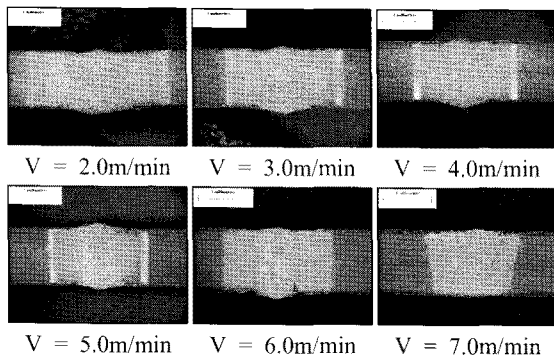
Cross sections of the weld bead according to various welding speed.
